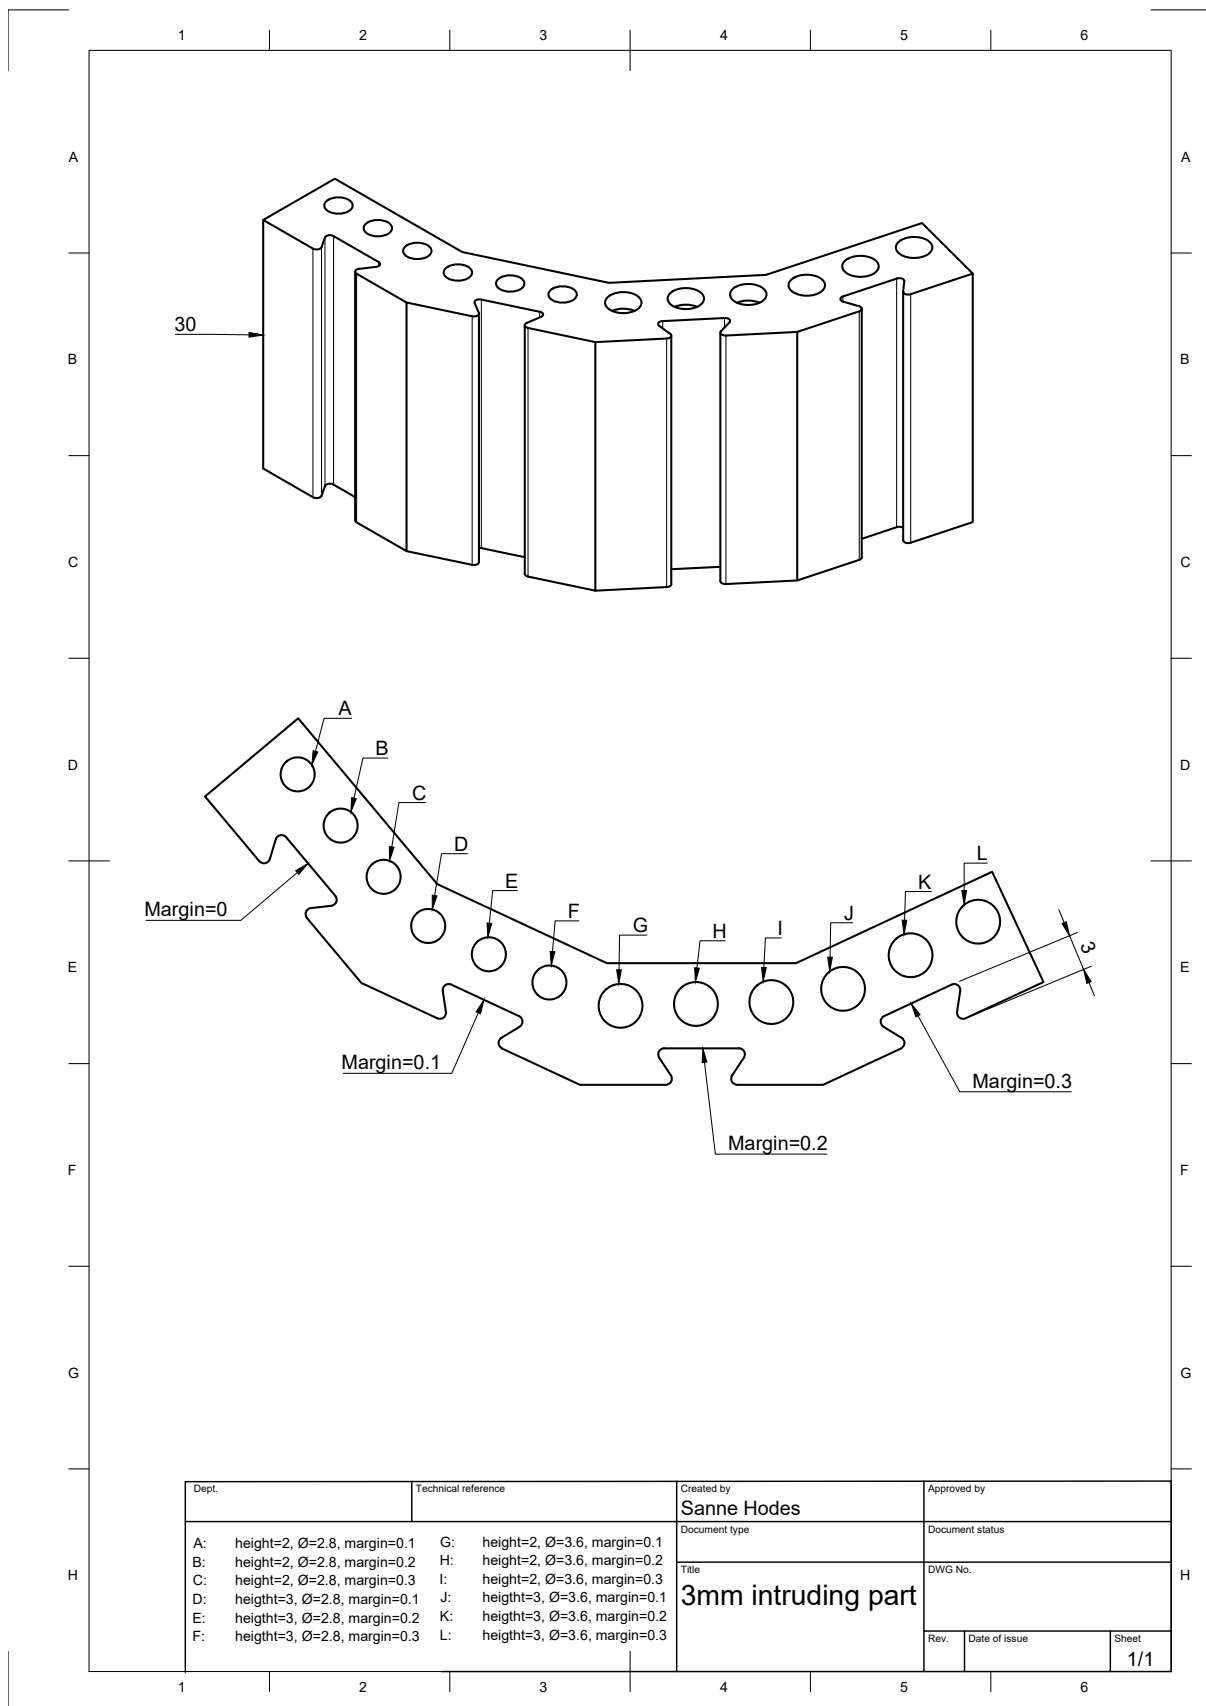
Technical drawing of the test cube with the 3 mm intruding part
